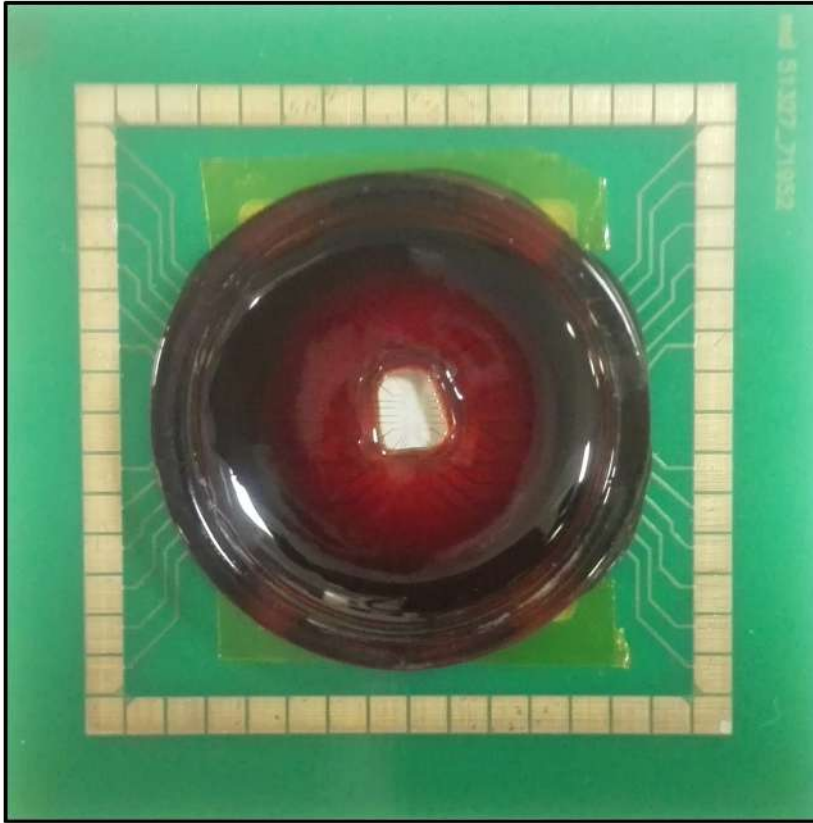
Picture of a MEA device bonded to a PCB and packaged in epoxy glue.
